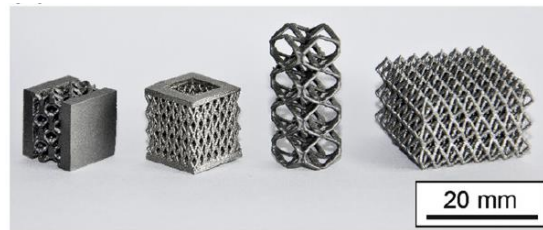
Fabrication using Selective Laser Melting [117](device #4)
